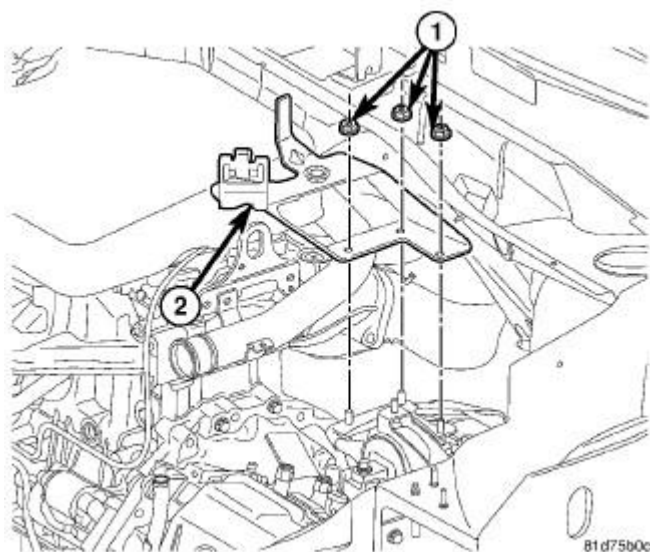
Coolant Overflow Bottle Bracket & Fasteners
